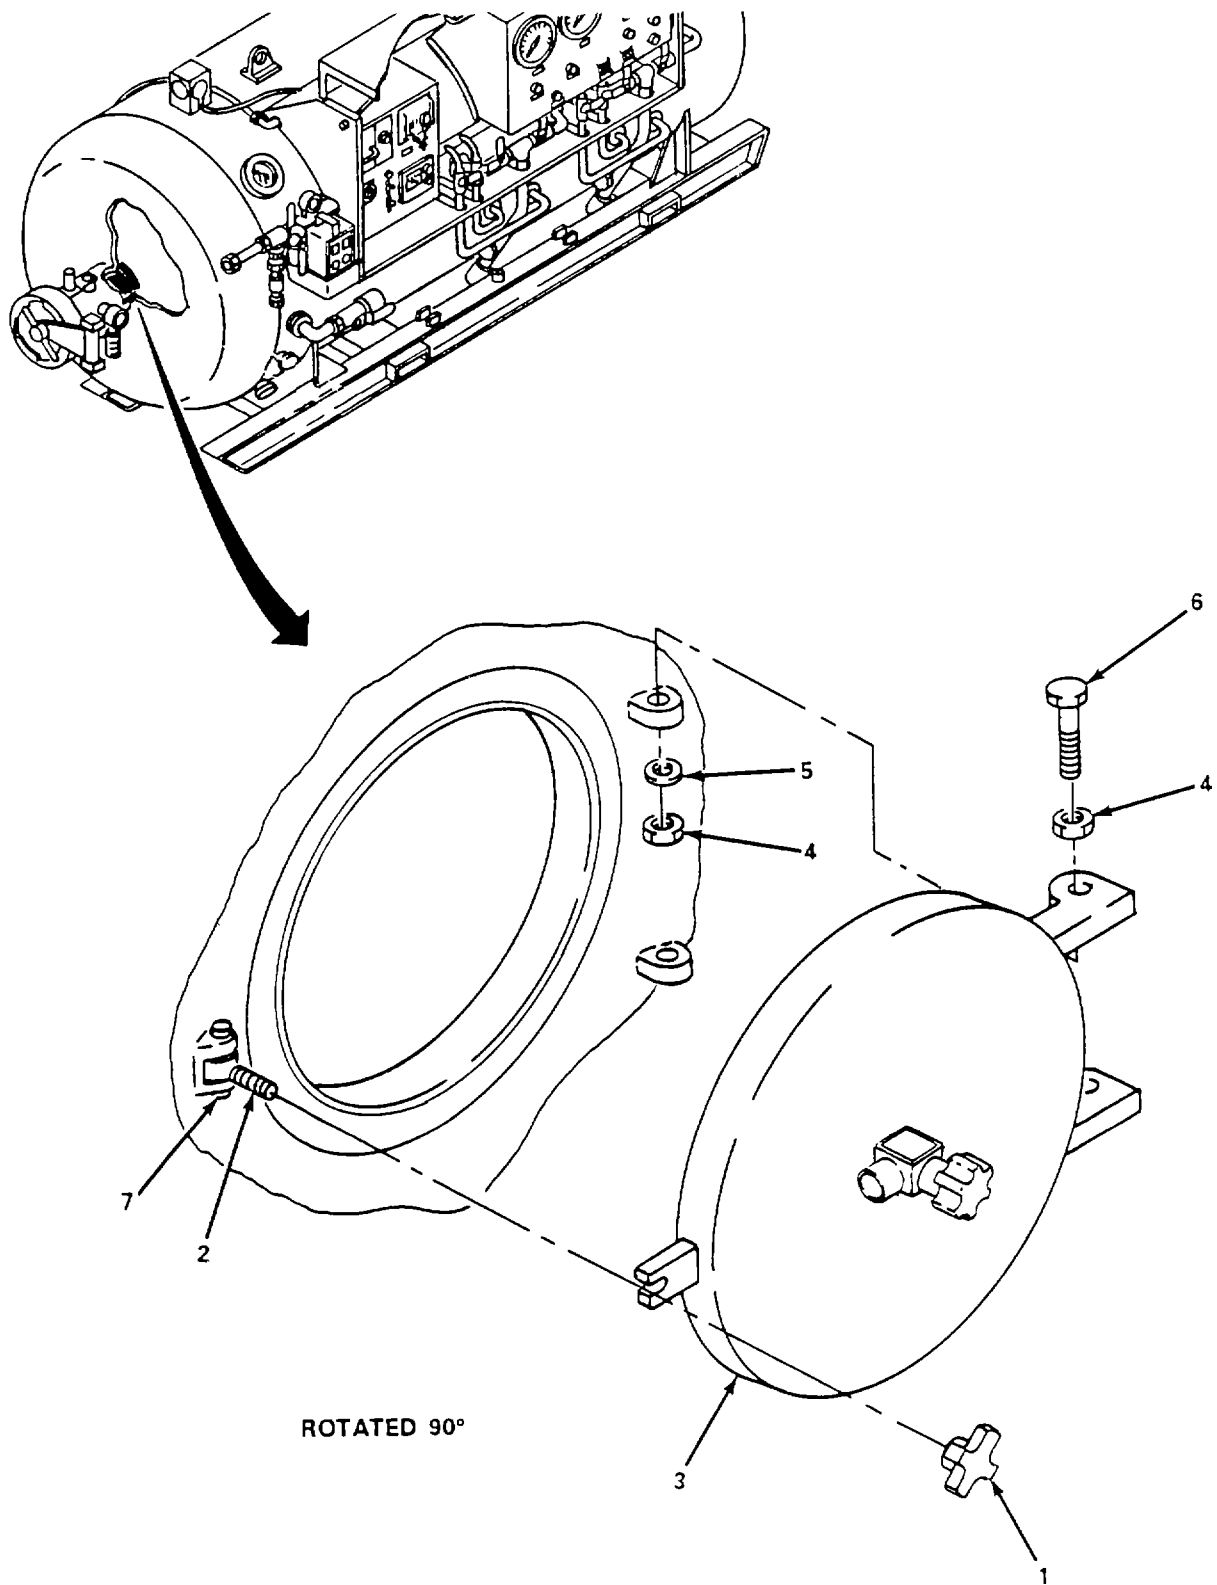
Medical Lock (M/L) Inner Door Assembly, Replace.
